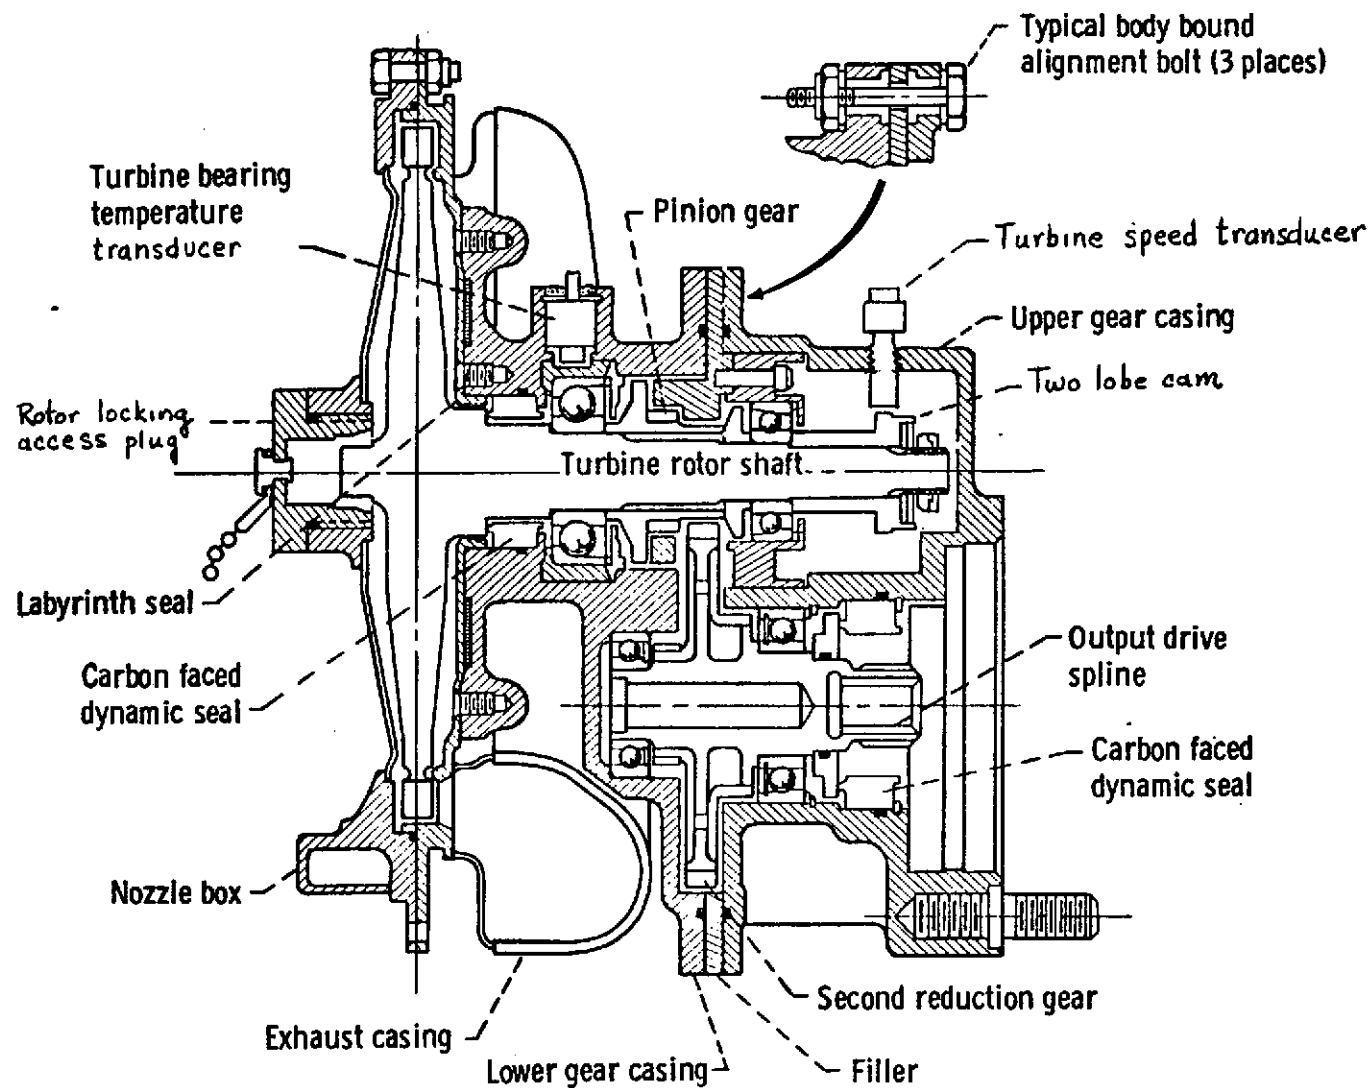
B-4 CROSS SECTION VIEW OF CENTAUR BOOST PUMP TURBINE DRIVE
